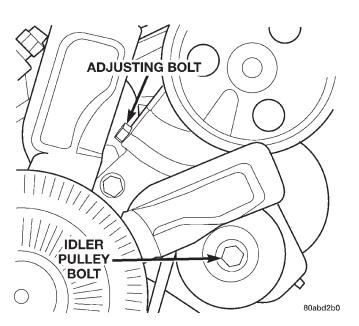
Power Steering Pump Bracket and Idler Pulley
